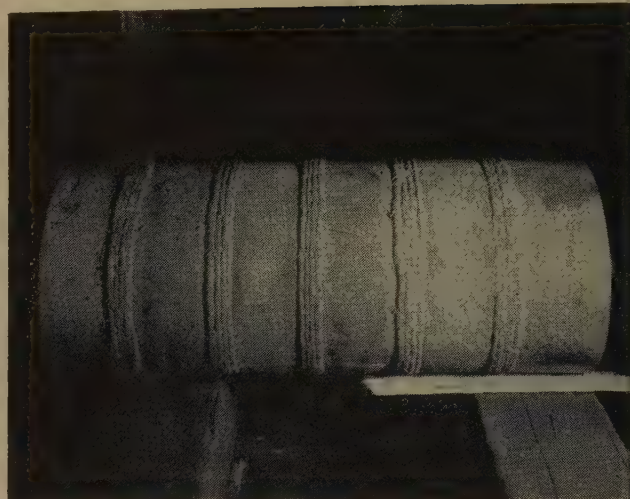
MULTIWELD TEST PIECE BEFORE MACHINING
